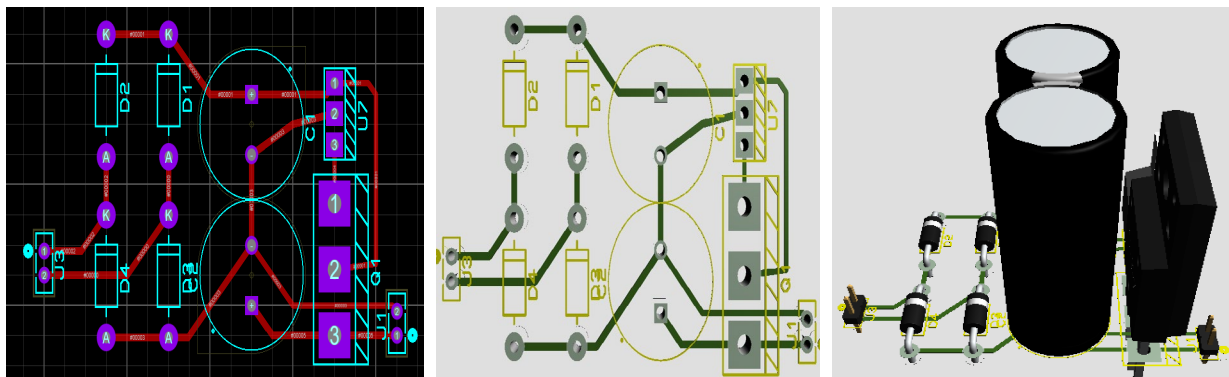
PCB of the power supply component side (left), soldering side (middle) and a 3D view of the component side (right).
